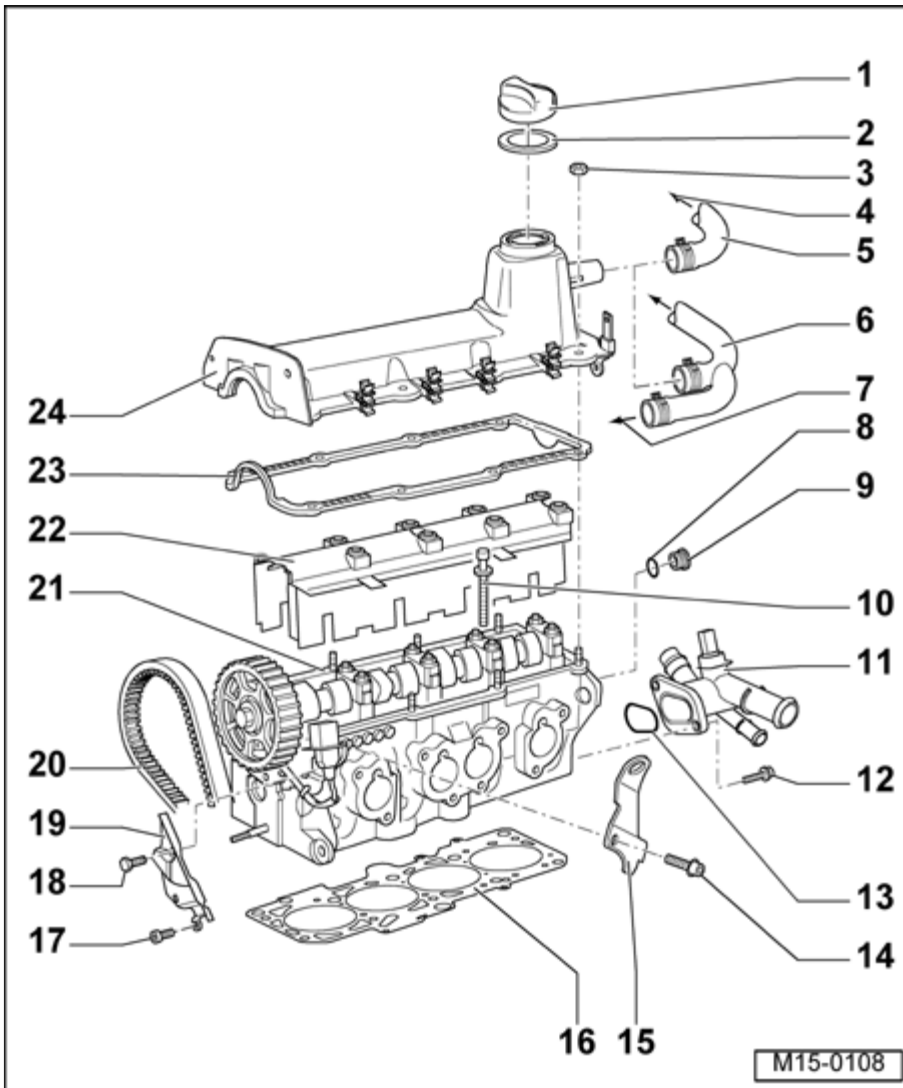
Exploded View Of Cylinder Head Components - Engine Code BEV
